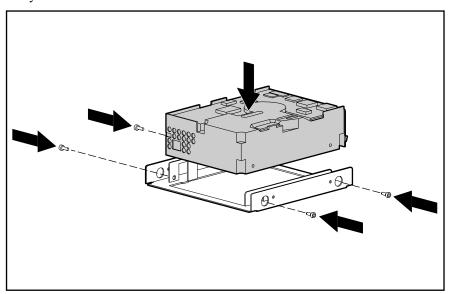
Attaching a 3.5-Inch Drive to a 5.25-Inch Bracket
